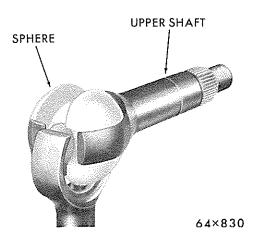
Removing or Installing the Spherical Bearing Spring
